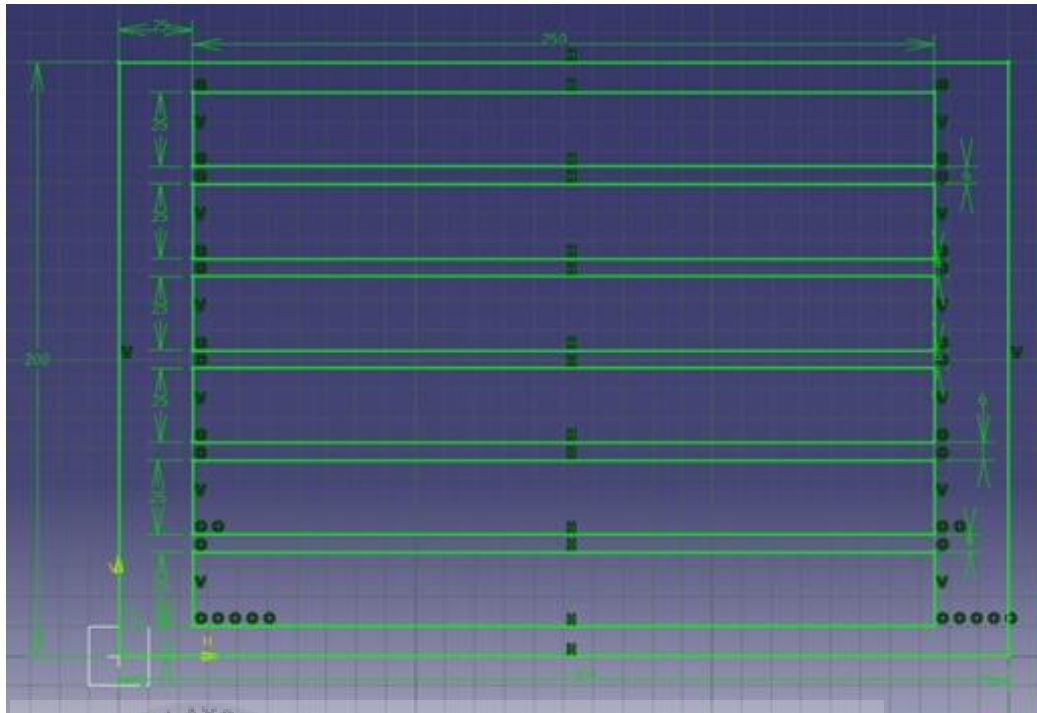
The parameter design of specimens for tensile and flexural testing
